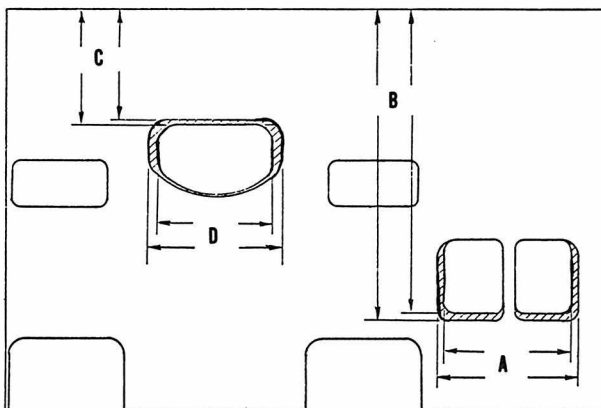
Areas of cylinder to be modified for TT and scrambles.
